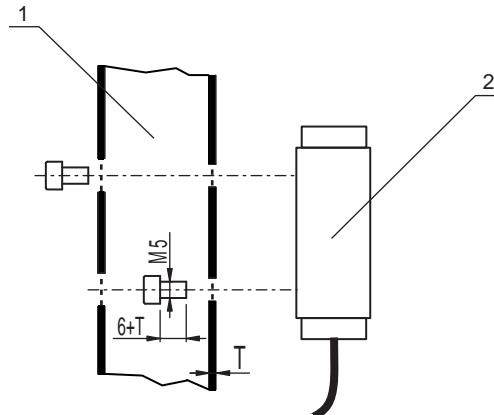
Hinge mounts; length of the fastening screws =  $6 + T$  mm
